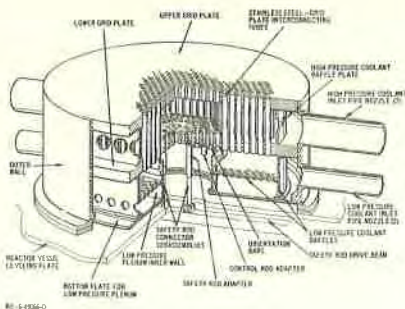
Reactor Vessel Grid Plenum Assembly.
